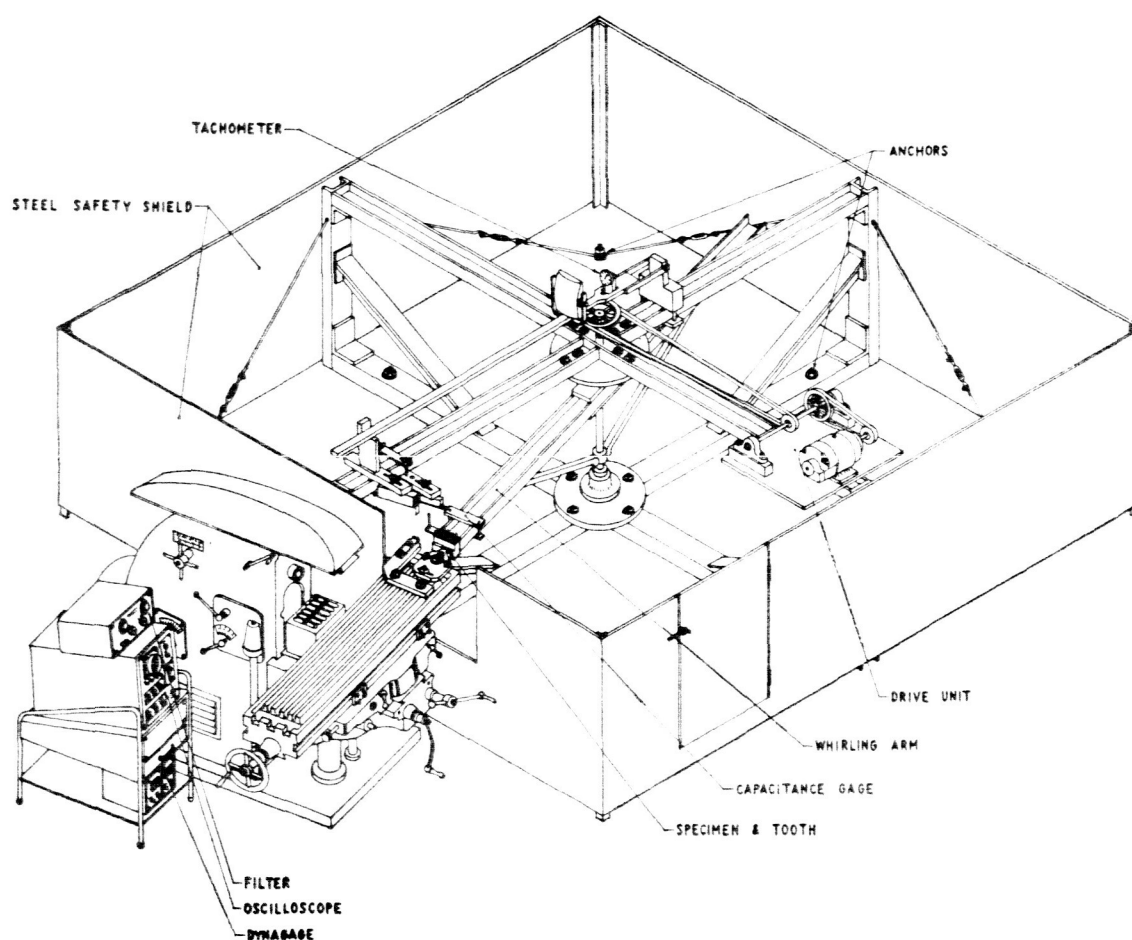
Detail of apparatus used for cutting tests showing whirling arm, milling machine, and related instrumentation.
